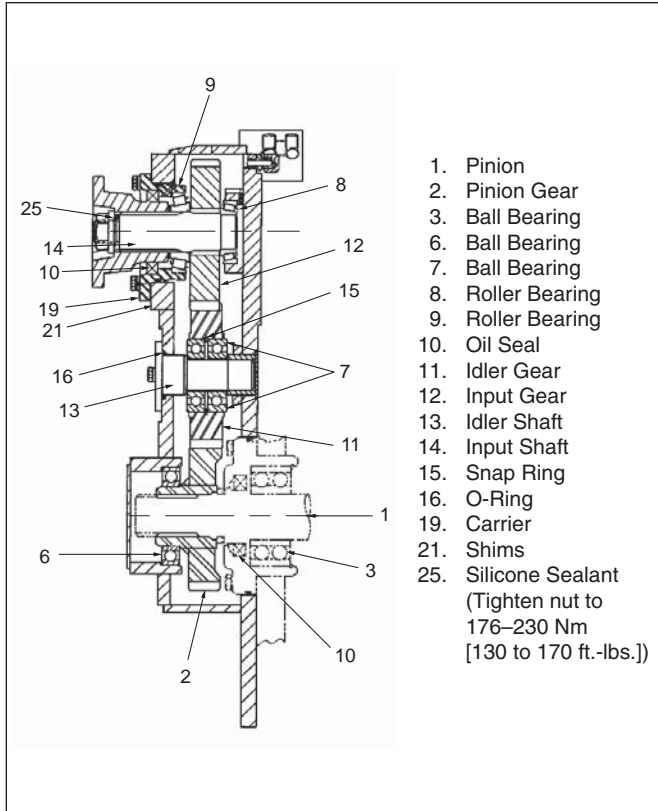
Gearbox for Komatsu D83-1 & D85ESS-2
